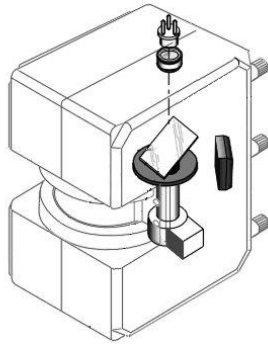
Principle of an opto-mechanical assembly with rotational mirror
